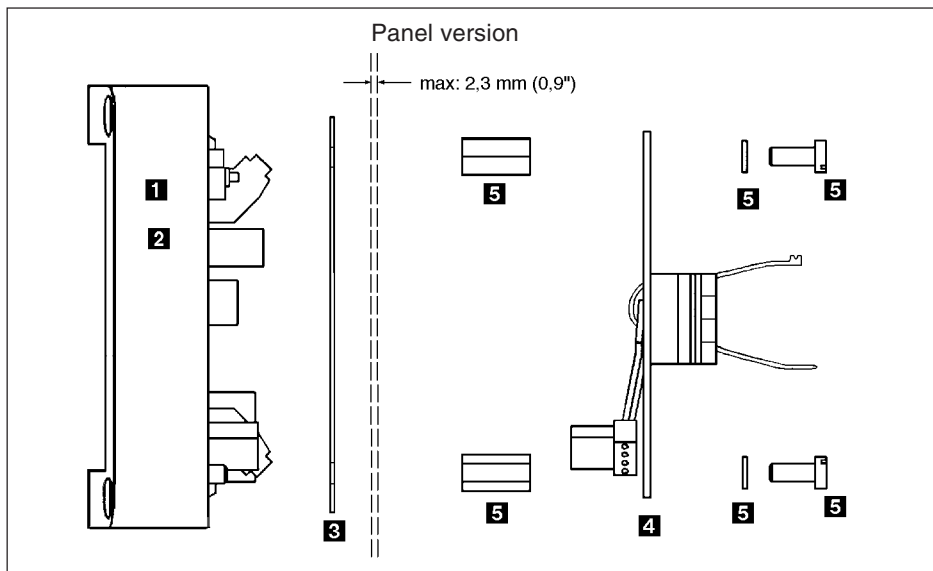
Spare parts explosion drawing type 8205 panel version
